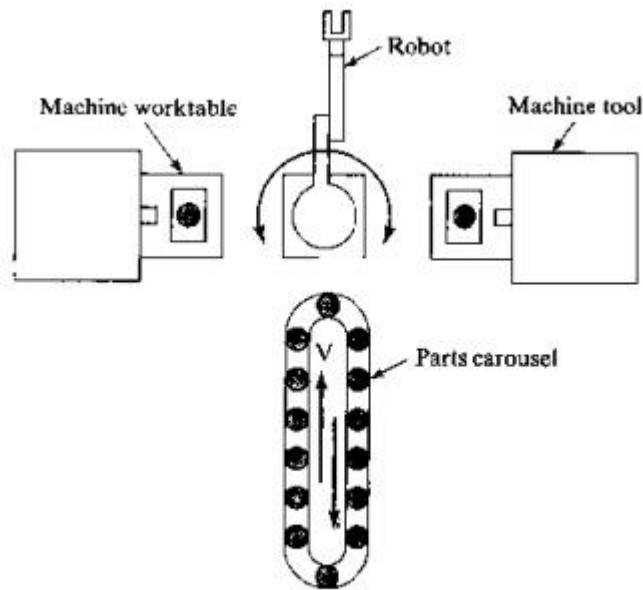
Automated manufacturing cell with two machine tools and robot. Is it a flexible cell?
